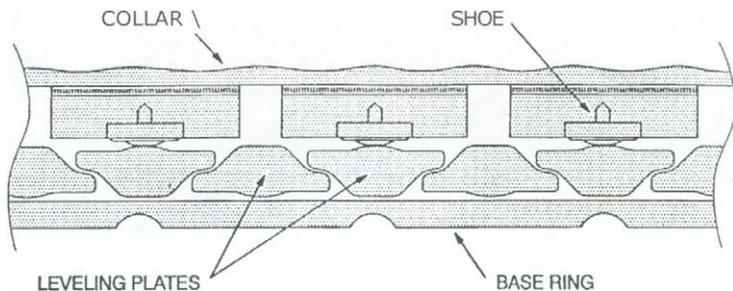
Self-equalizing tilt-pad thrust bearing (View - looking down on assembly) (Courtesy of Kingsbury, Inc.)
